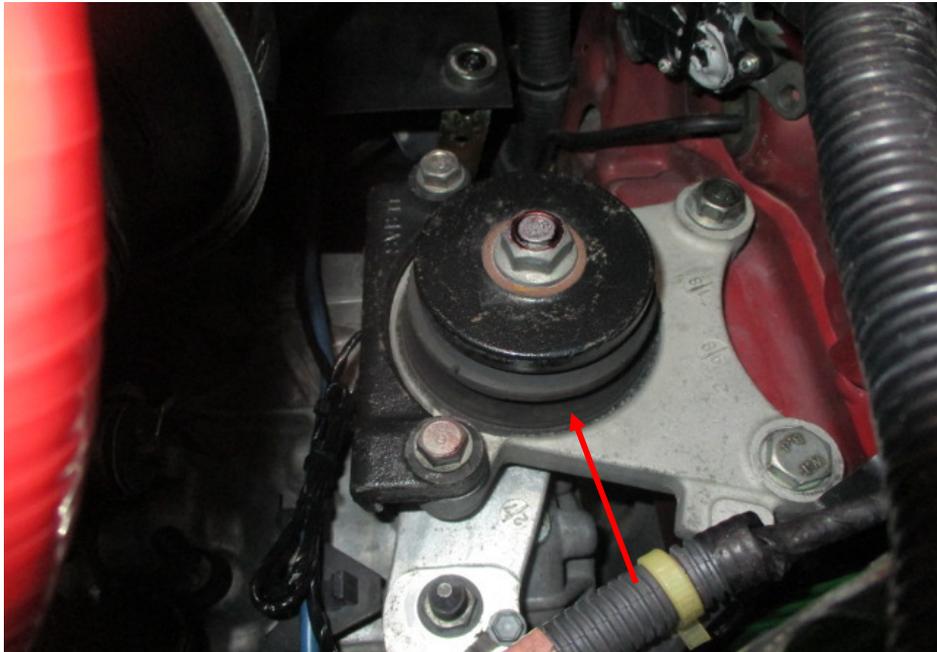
shows a closer view of the bracket supporting the left side of the Motor Car's transmission. This bracket was mounted onto the left side front chassis, adjacent to the left side front wheelhouse. The bracket was with rubber bushing (arrowed) that absorbs any vibrations arising from the rotation of the transmission gears, minimising any stress to the bracket and correspondingly also minimise any stress to the left side front chassis member.
